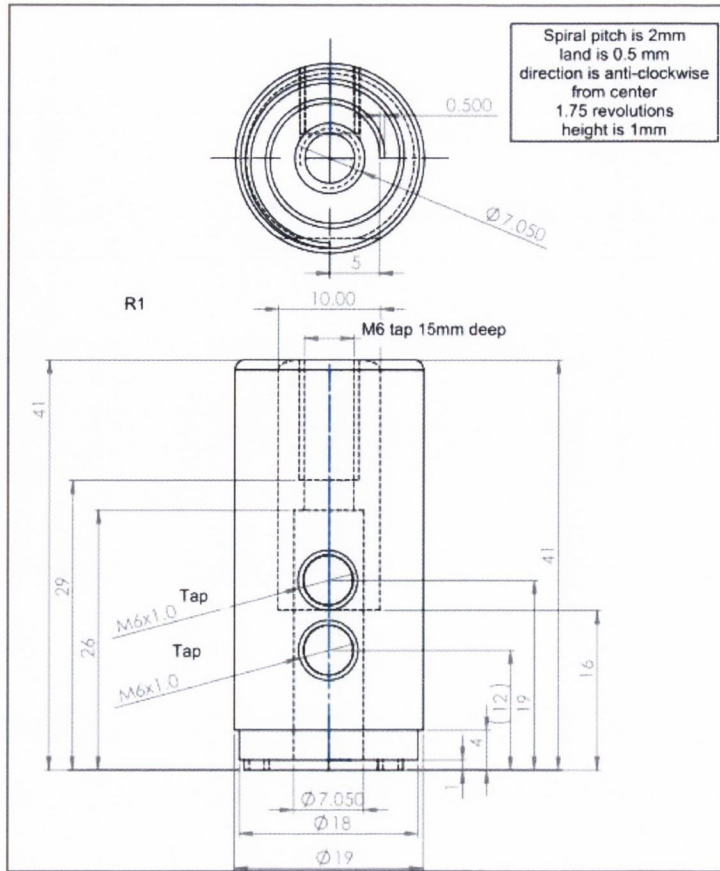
18mm Scrolled Shoulder, also Manufactured a 22mm Shoulder
